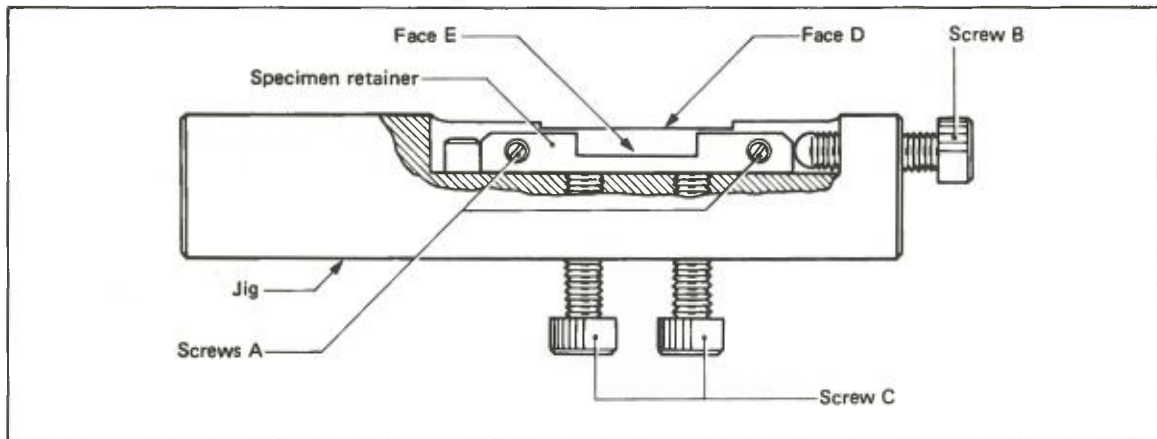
Attaching the frame to the specimen height adjusting jig
